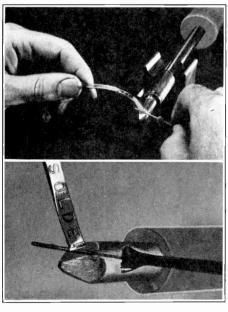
Method of holding the solder and wire when tinning either solid or stranded wire. The heated soldering iron is left in its holder. The close-up photo shows a partly tinned wire. Slide the wire back and forth between the soldering iron tip and the solder until it is completely tinned for about half an inch from the end.
